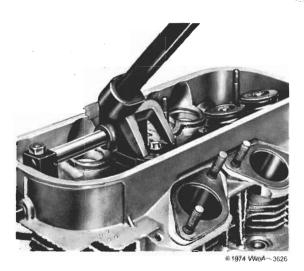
Valve spring tool VW 311s being used to push spring retainer down valve stem against spring tension (dual-carburetor or fuel injection engine).
